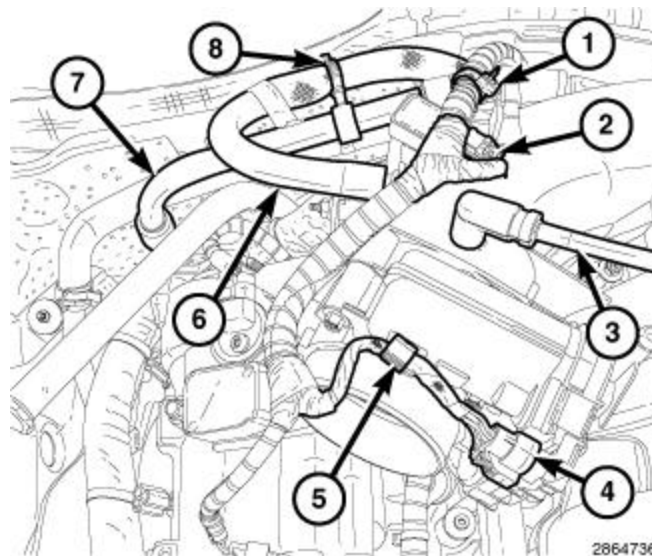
MAP Sensor, ETC, PCV Hose, Brake Booster Vacuum Hose, EVAP Vapor Purge Line, Clip & Wire Harness Retainer
